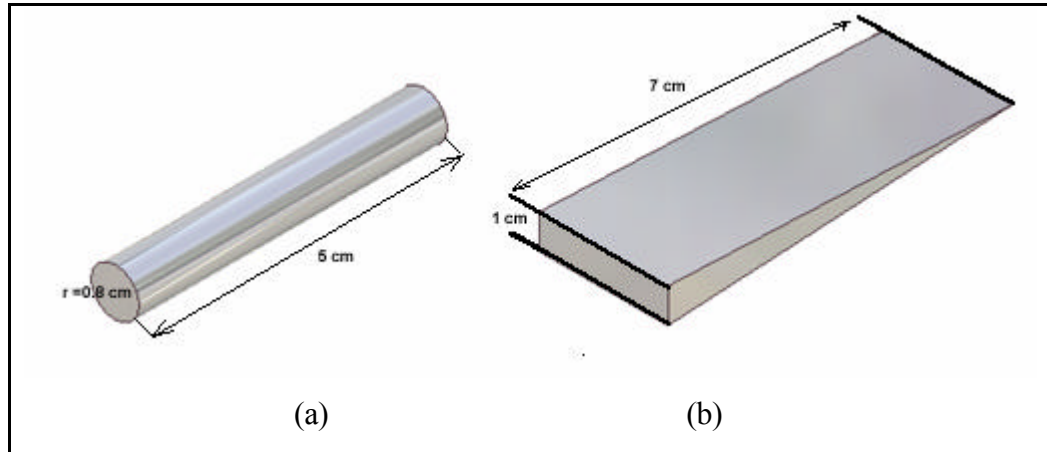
Drawings of (a) Cylindrical specimen (b) Wedge – shaped specimen
